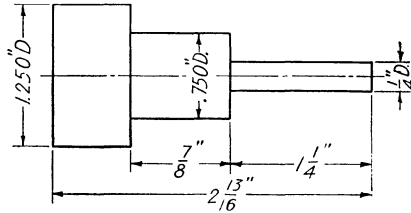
Method of dimensioning a cylindrical part. In this one-view drawing no side view is necessary.
